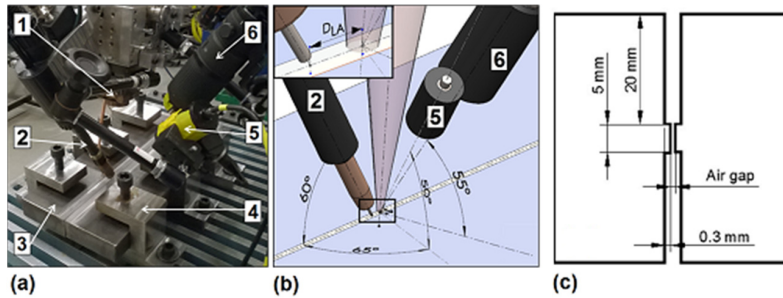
(a) and (b) is experimental set-up: 1 – fiber laser equipment; 2 – MAG equipment; 3 – steel workpieces; 4 – heavy clamping system; 5 – illumination pulsed diode laser; 6 – high speed imaging camera; (c) gap preparation of plates.
